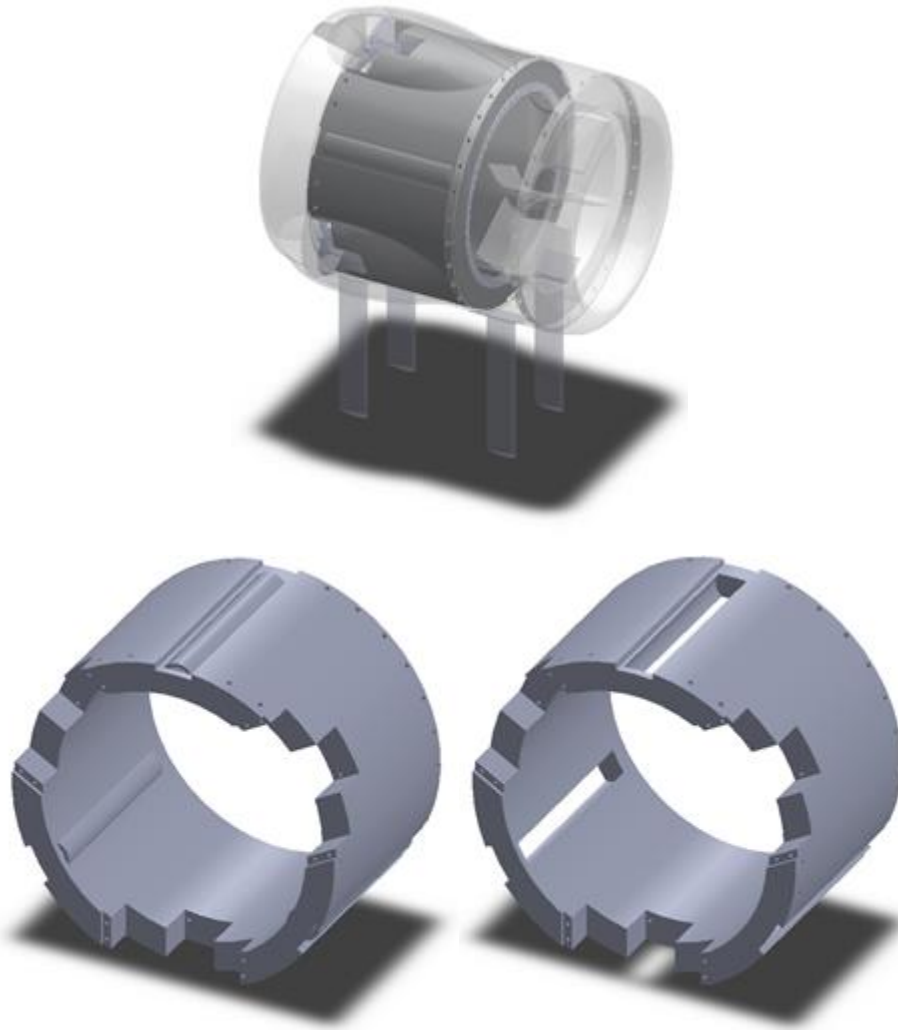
counterclockwise from top: Roller bearing holder in casing, with rollers, and without rollers
